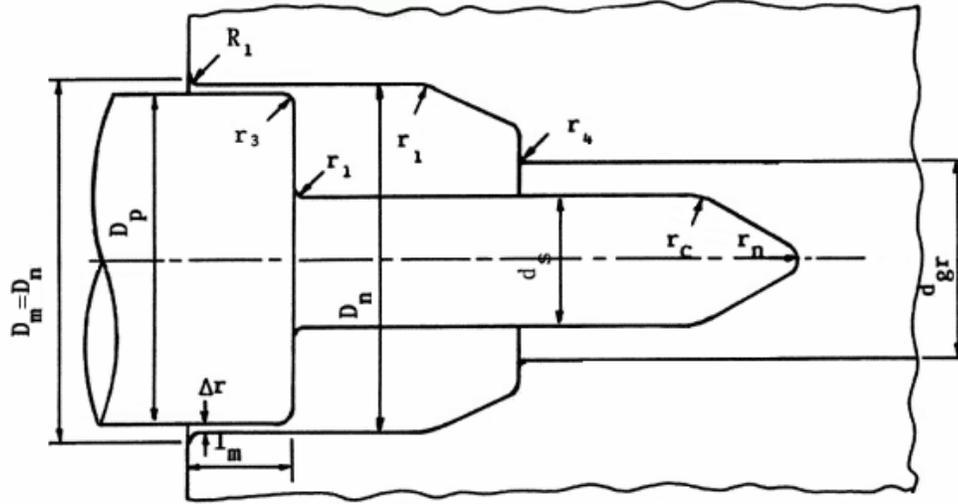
Die cavity in gripper dies for flashless forging [3]
